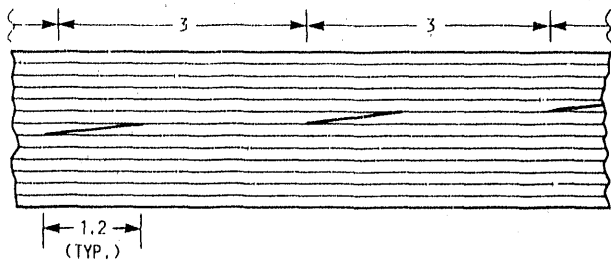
Details of veneer scarf joints for tension, compression, and fatigue specimens. (Dimensions are in inches.)
